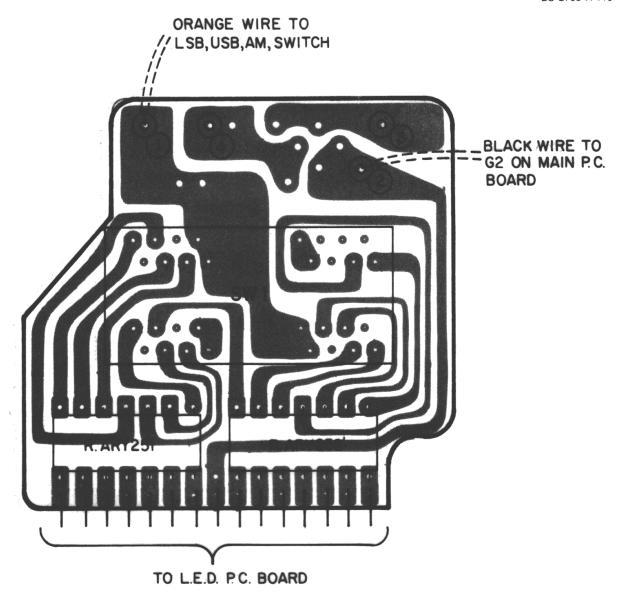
Component Outline LED P.C. Board, Model 2705
